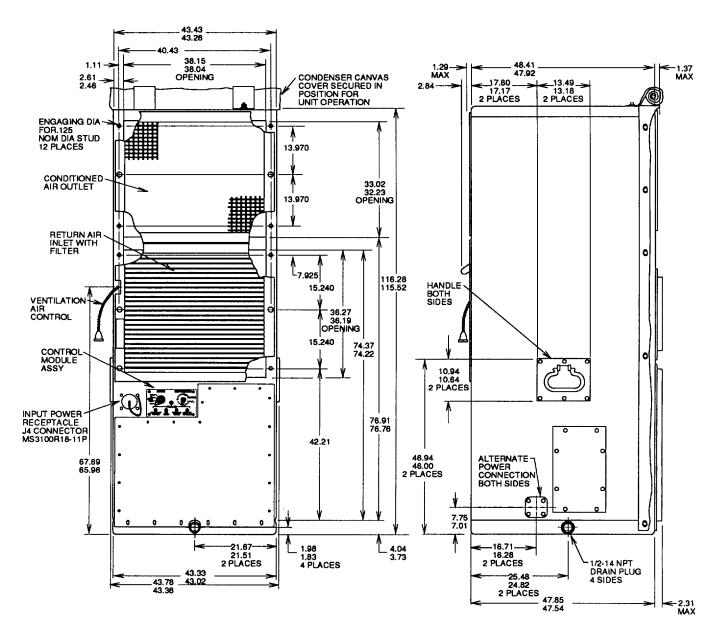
Installation Dimensions (Sheet 4 of 6)
